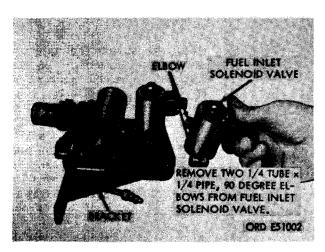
REMOVING OR INSTALLING FUEL INLET SOLENOID VALVE ELBOWS.
